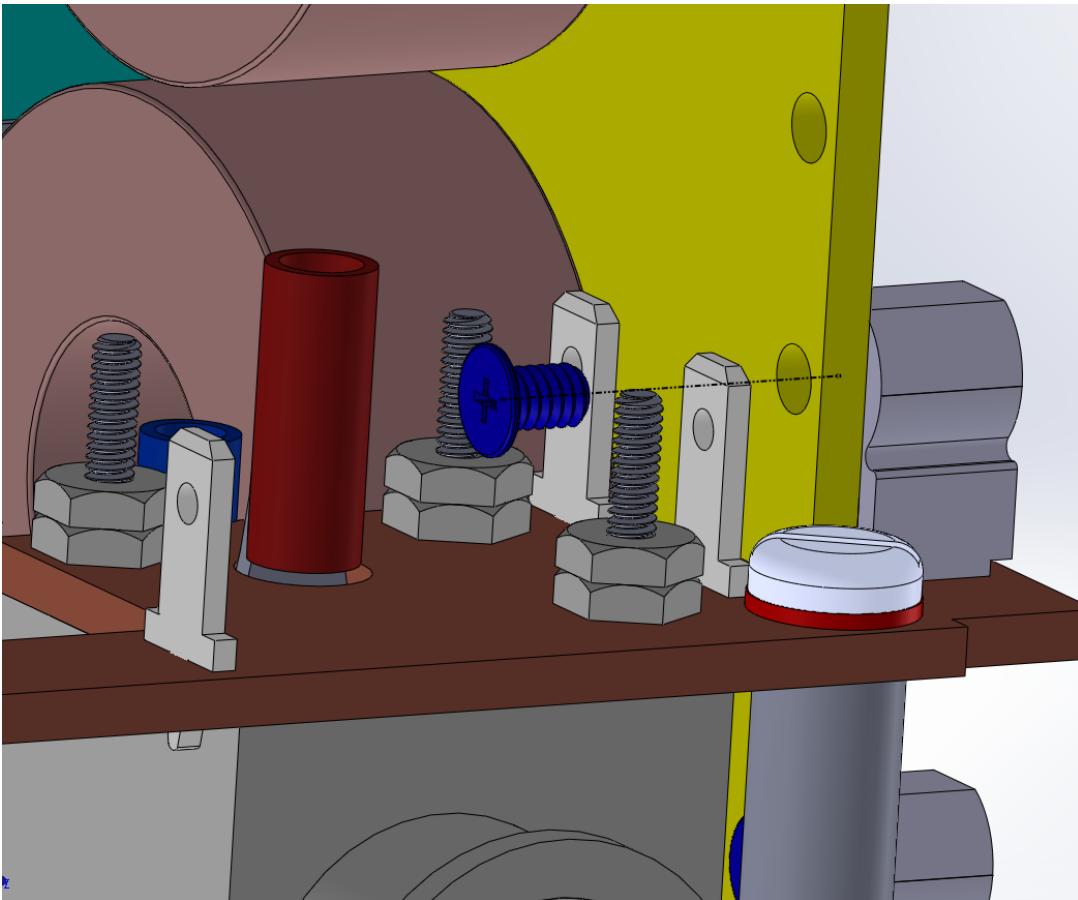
Use ONE M2 Board connection screw to connect the INNER FRONT of BPR to B2. To complete this step, you may need to bend the Wire Harness out of the way.
